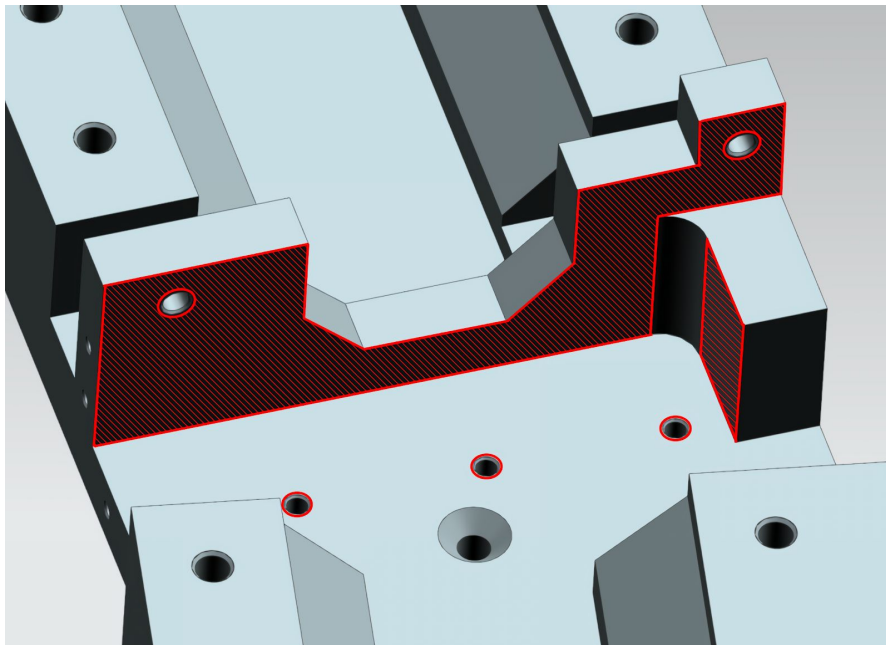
Driving surfaces and mounting holes for the cassette showed in red
